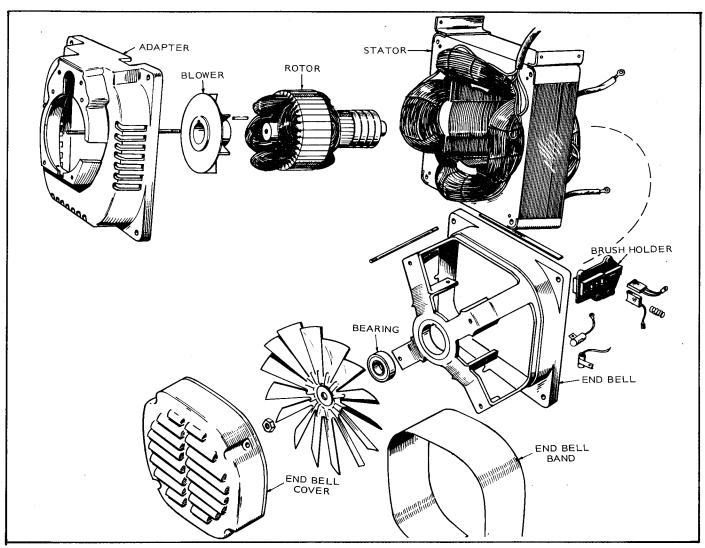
NB, NH, CCK (BEGIN SPEC R) GENERATOR ASSEMBLY
